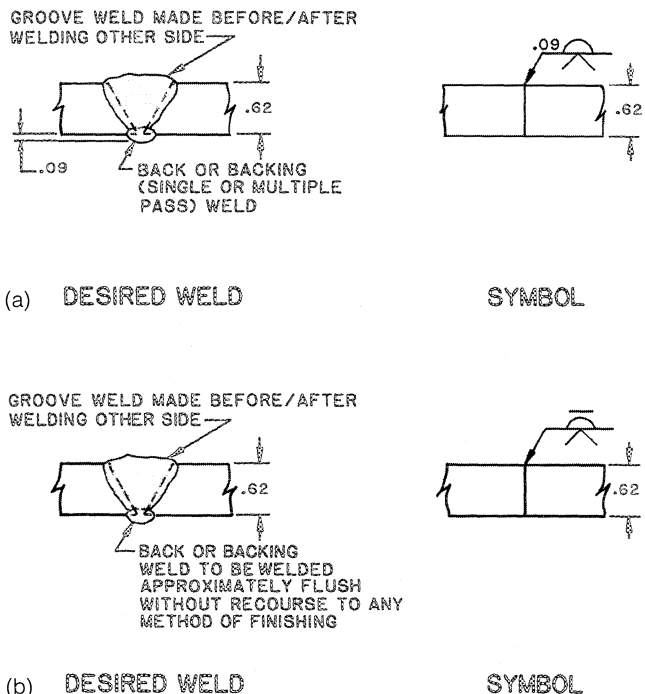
Bead Weld Symbols Used to Indicate Bead-Type Back and Backing Weld
